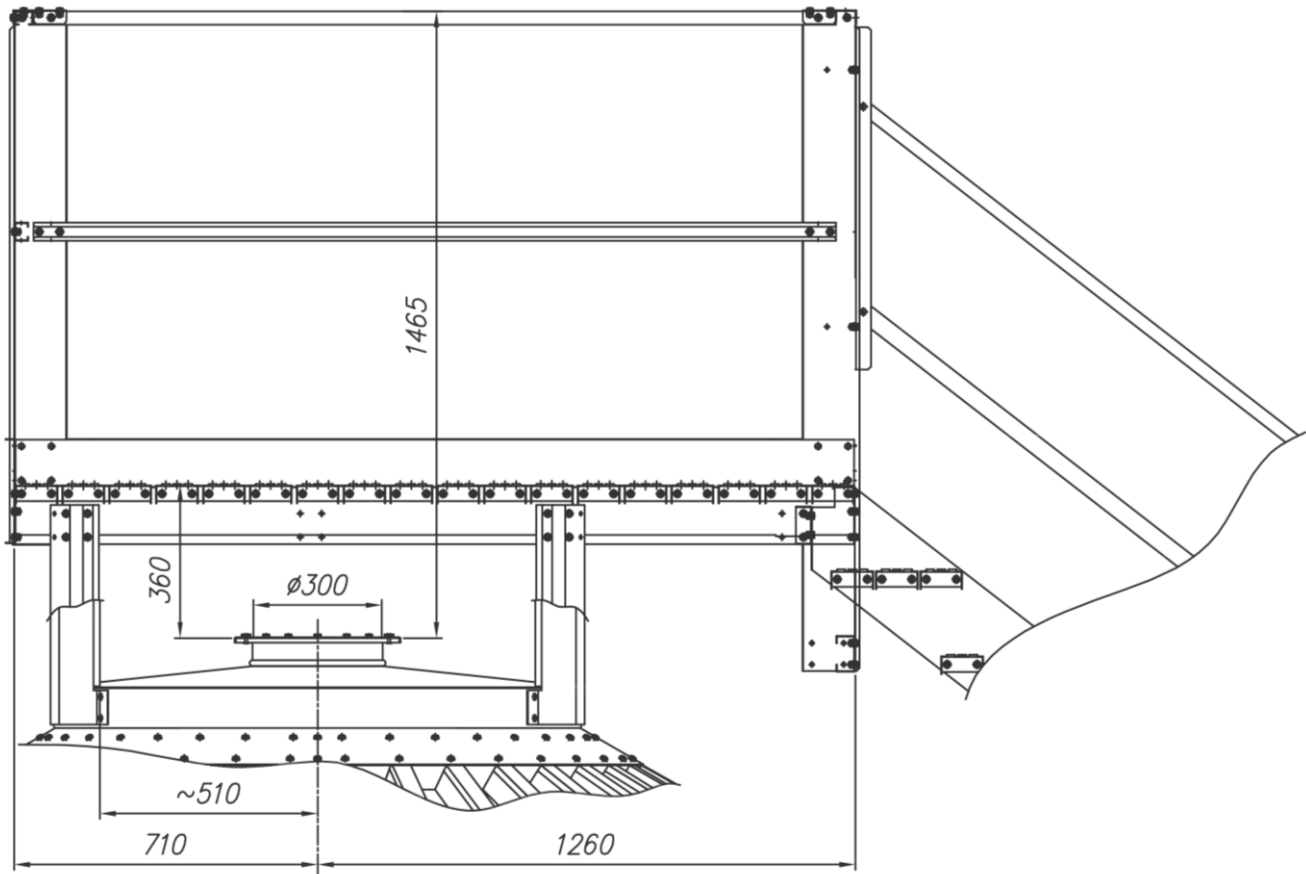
A diagram showing a central loading inlet together with conditions and options for connecting loading equipment to the collar in silos of the BIN500, BIN1000 and BIN1500 type with the collar platform installed.
